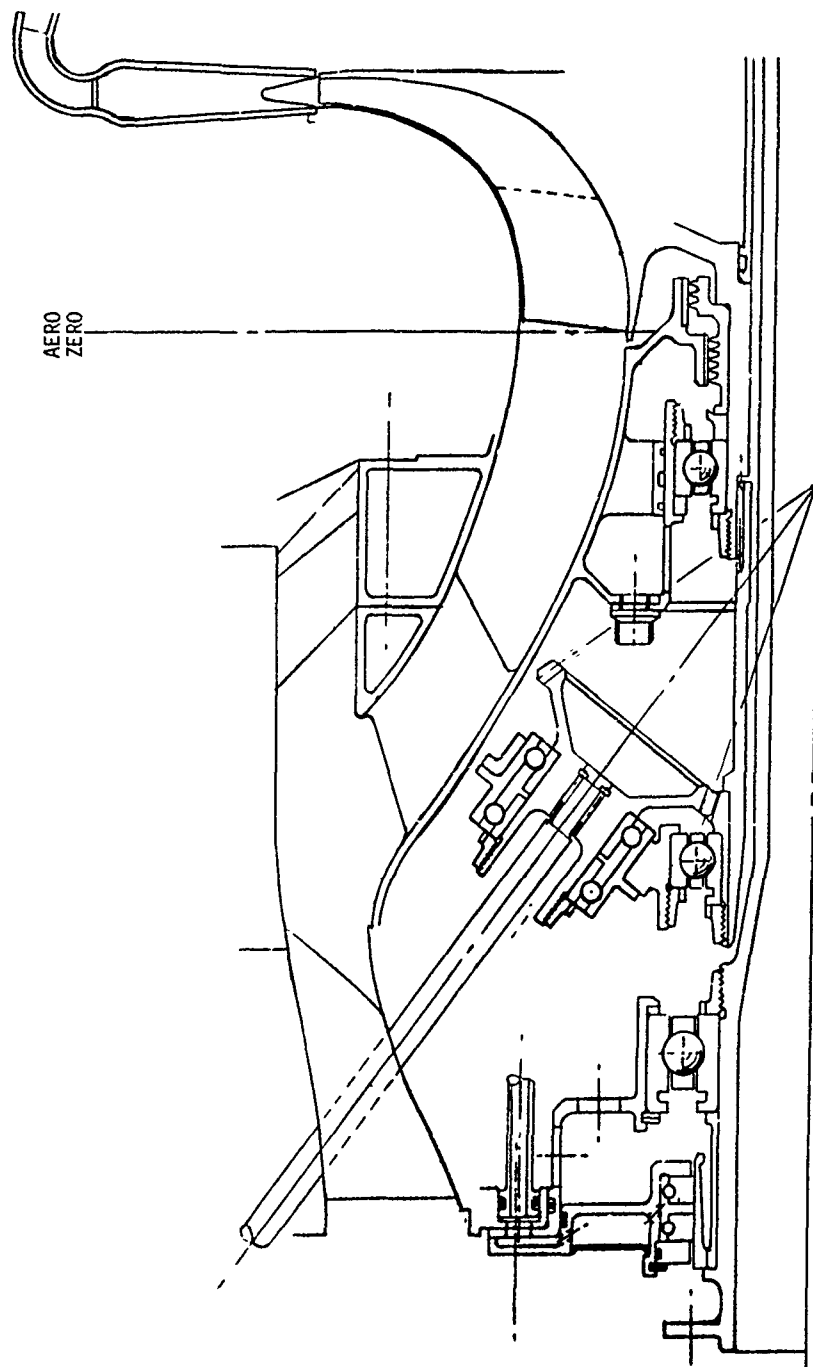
2 Lb/Sec T700 Type Separator With PTO Shaft Canted Forward.
